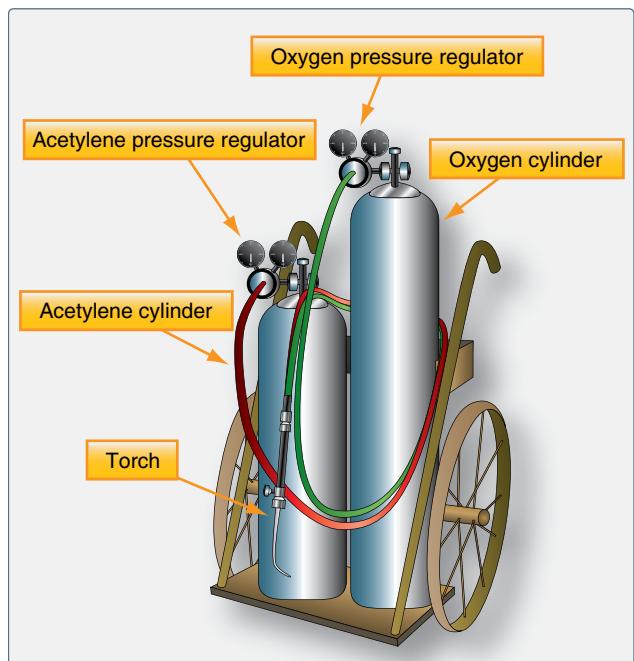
Portable oxy-acetylene welding outfit.
